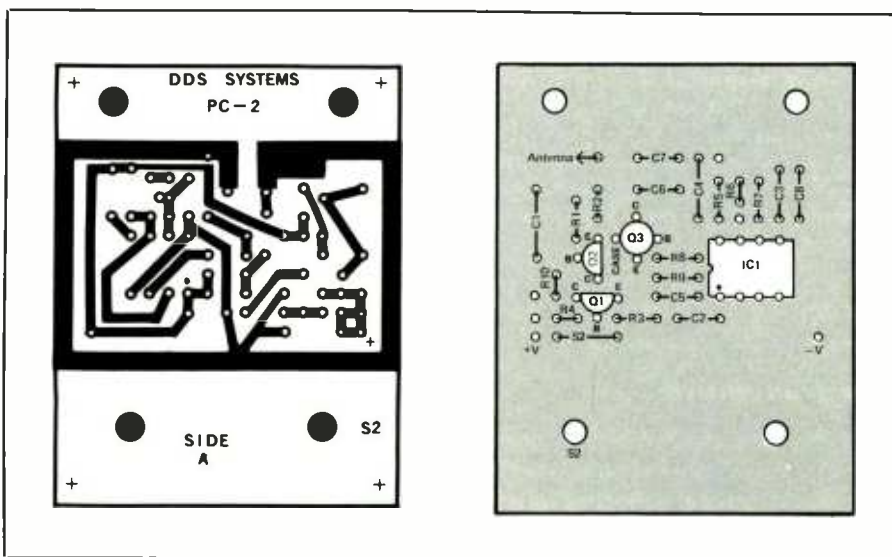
At left is shown the actual-size etching-and-drilling guide for the transmitter circuit. At right is the components-placement diagram for wiring this board.
